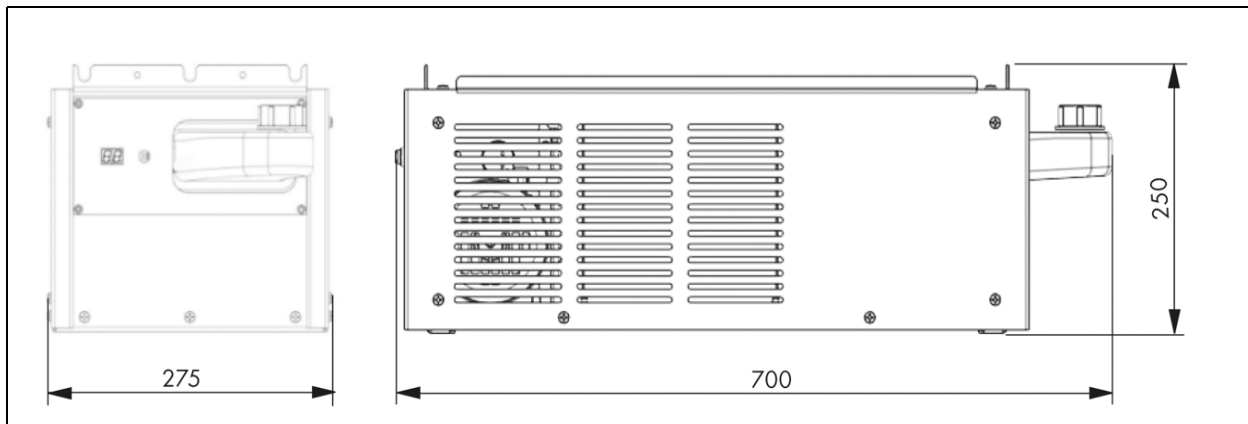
Dimensions of the iROB Cool coolant recirculator
